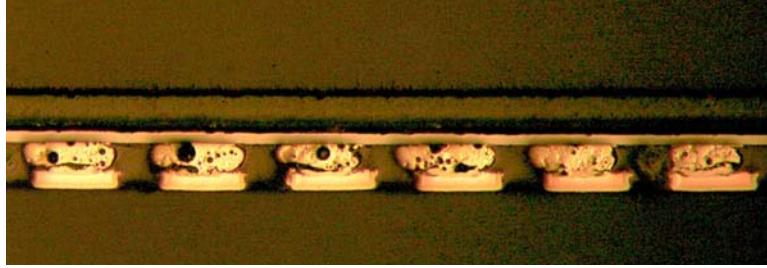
The Assembly Process of an Thin Die in Package with the Assistance of Sn63Pb37 Solder Paste
